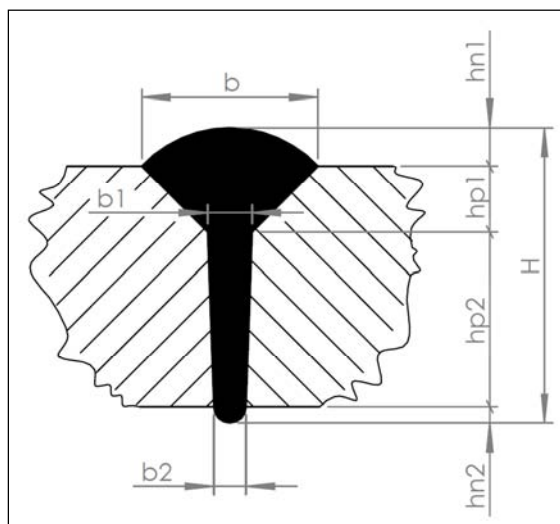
Schematic illustration of HLAW welded butt joint and weld bead geometries
